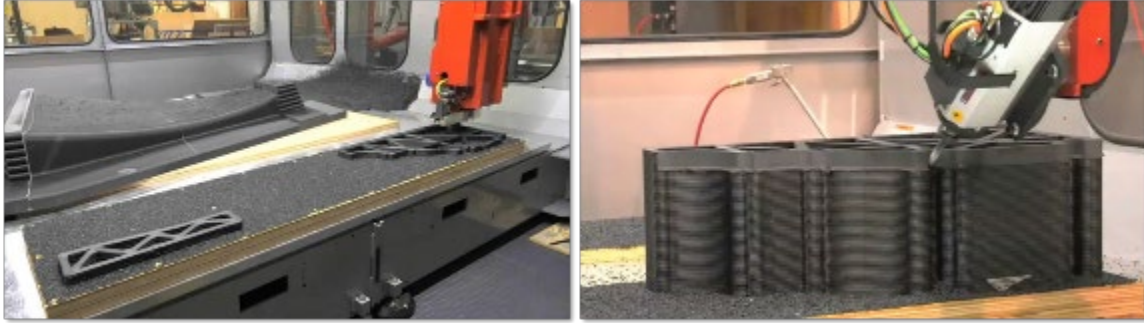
Left: printing of the two pieces needed for a prototype 12-inch deep cornice mold using ABS and 20% carbon fiber. Right: machining of the surface of the 3D printed mold to remove the “corduroy” surface with a CNC router.
